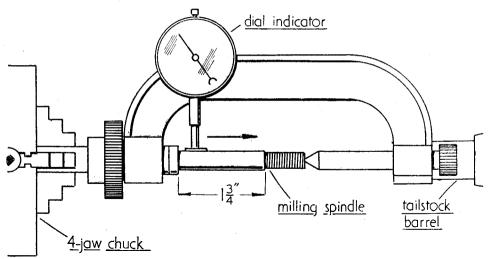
Testing the milling spindle for parallelism with the lathe bed
